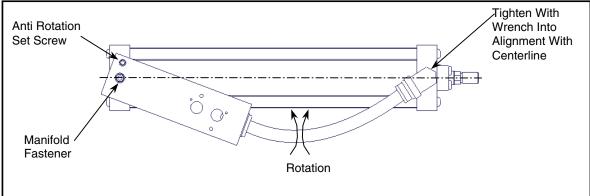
Manifold Assembly With Greater Than or Equal to 12" of Cylinder Stroke.
